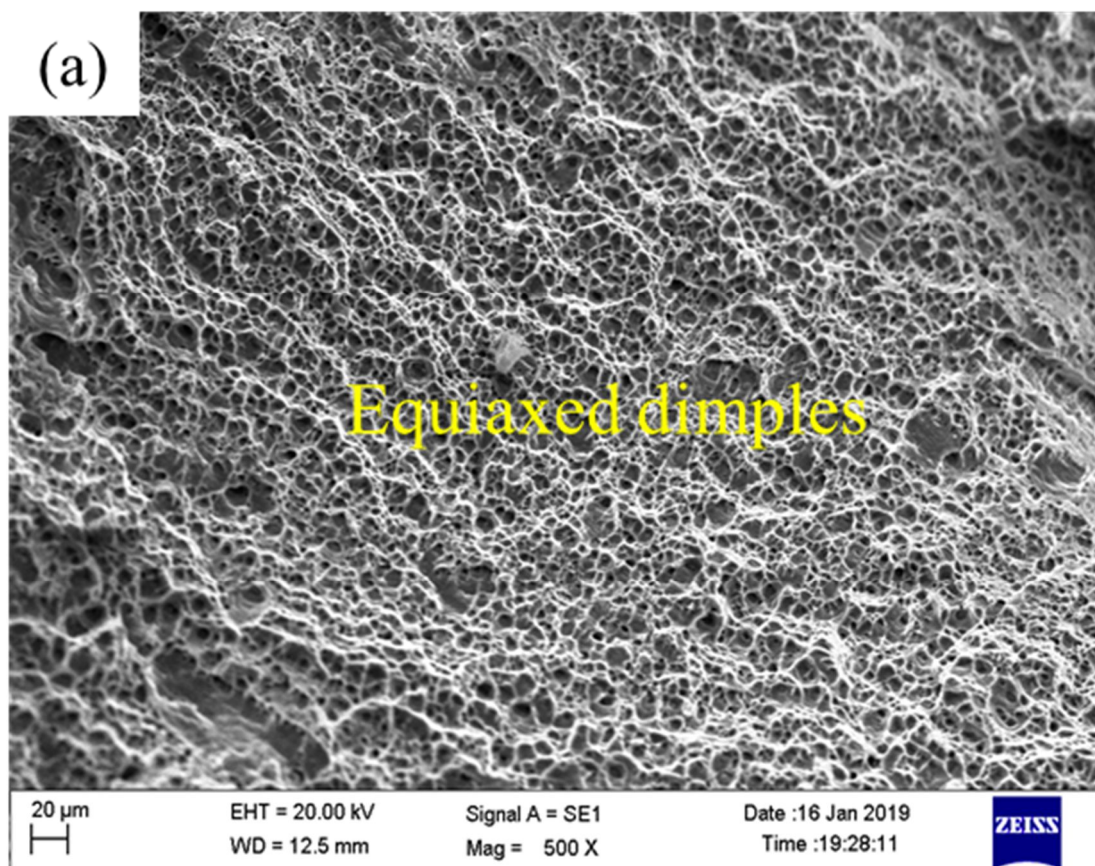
SEM micrographs of the fracture surface A6061-T6 equiaxed dimples
